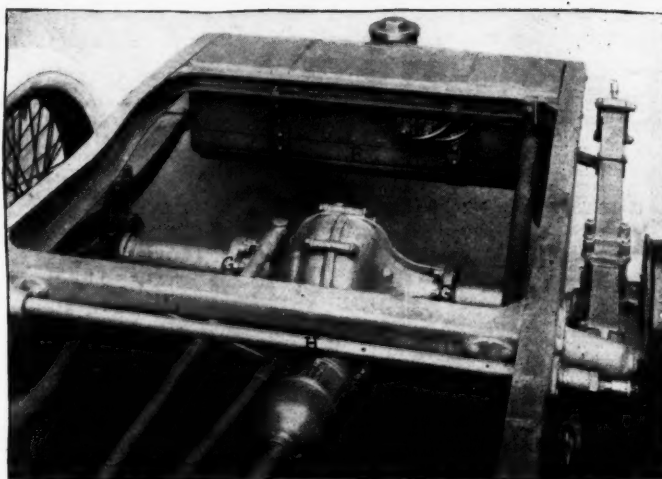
End view of the Napier 15-horsepower chassis. Note mounting of tank F, crosspiece H and torque connection G
